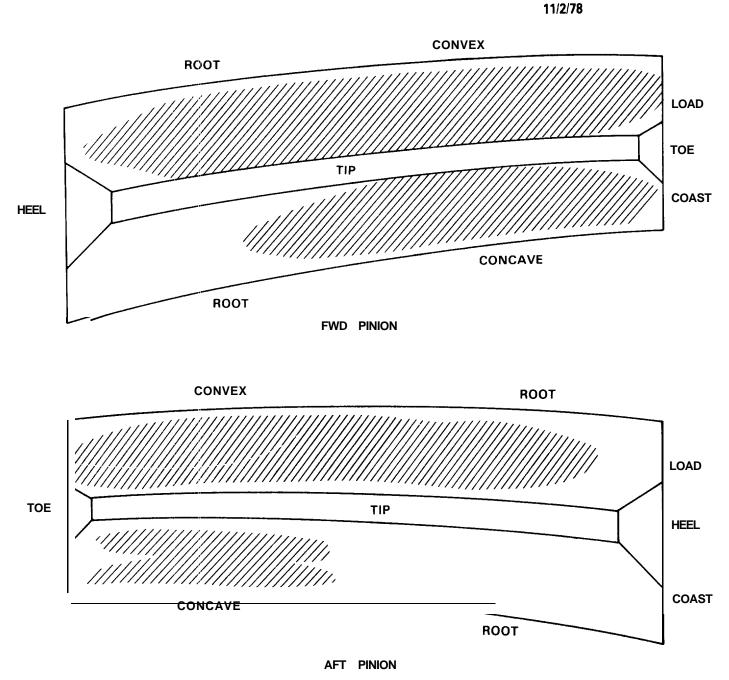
Tooth Contact Pattern: Starboard Upper Gears, at 268 Hours of Operation
